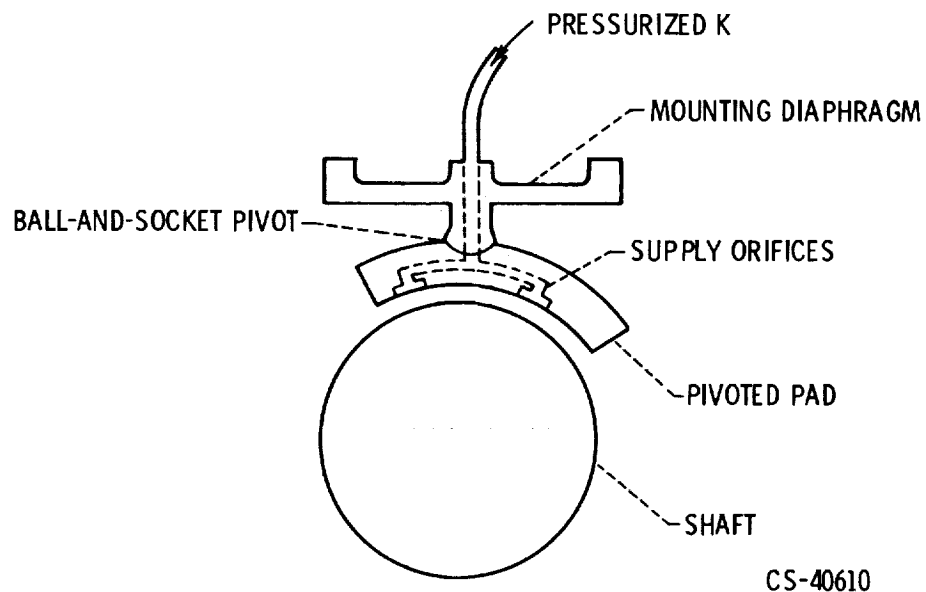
Mounting arrangement for pivoted-pad bearing.
